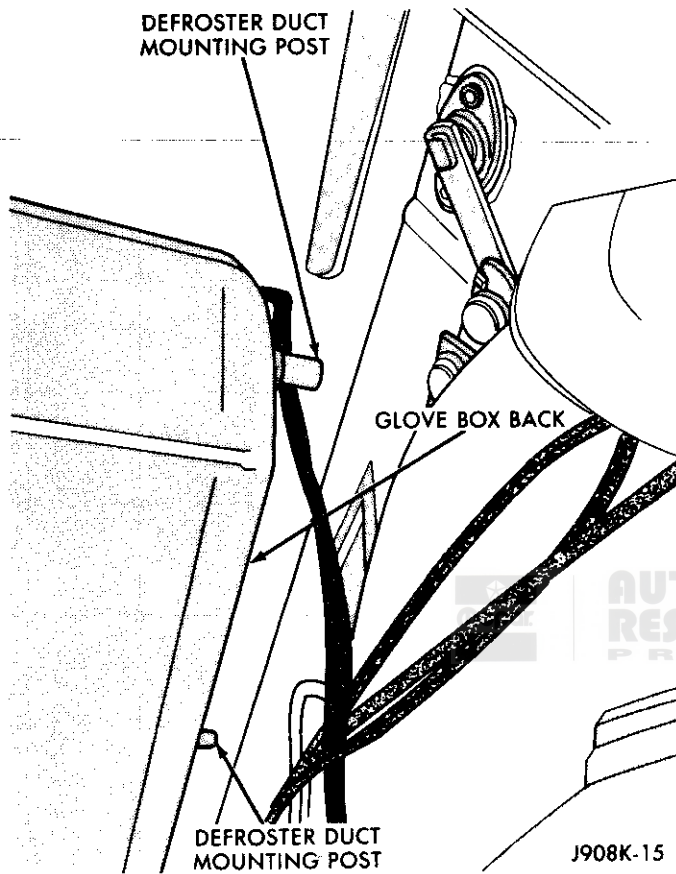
Remove Defroster Duct From Rear Of Glove Box
